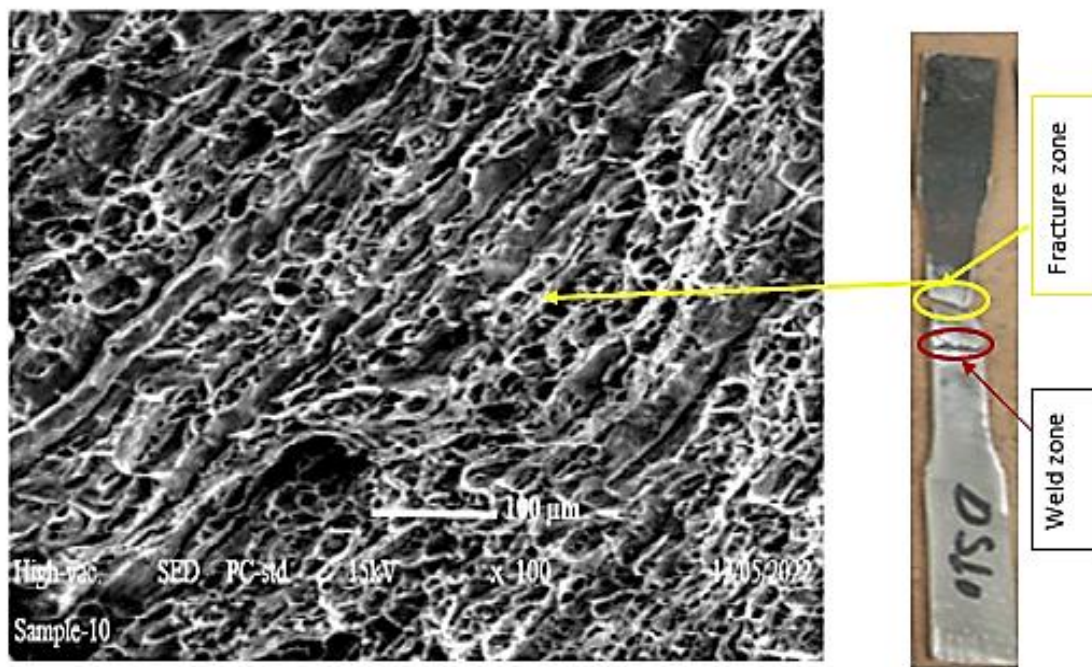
Tensile fracture surface, obtained in the base metal AISI 1020 low carbon steel
